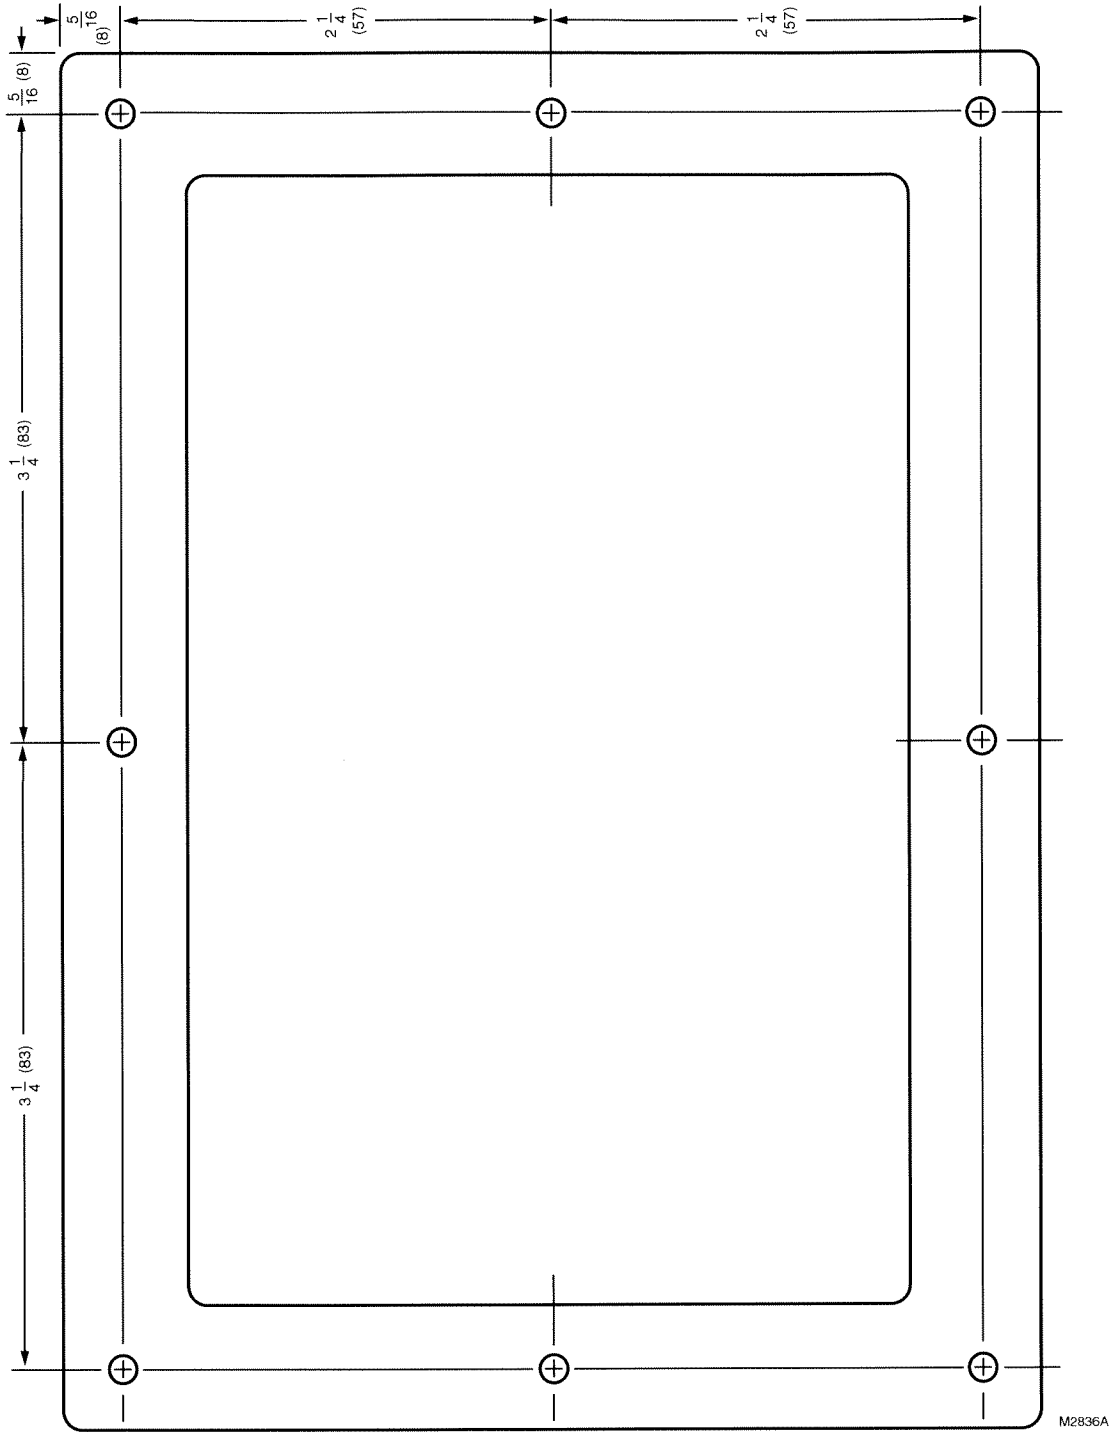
Full-sized mounting template for 204718 Cover Assembly in in. (mm).
